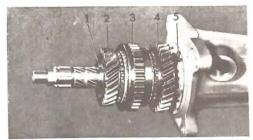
Gearwheels fitted to the end of the mainshaft.
